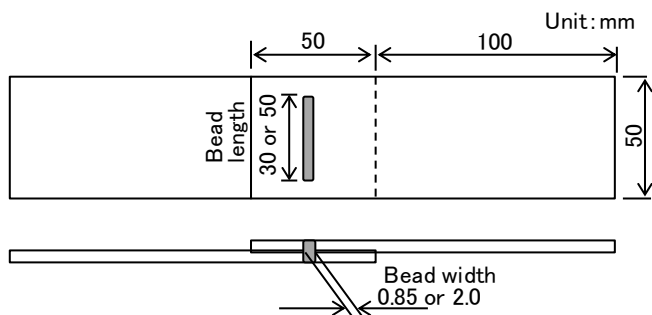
Schematic diagram of laser welded lap joint for the tensile test.
